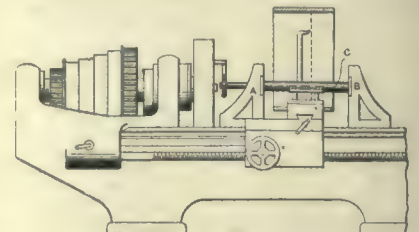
Lathe for Boring Elliptical Holes Showing Device in Place.
